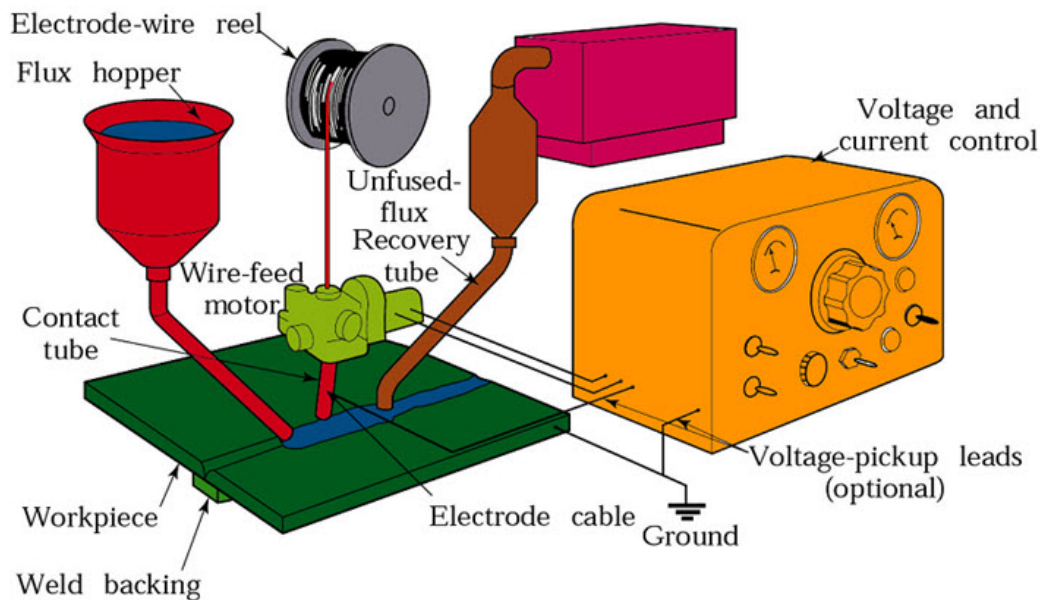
Schematic illustration of the submerged-arc welding process and equipment. The unfused flux is recovered and reused. (Source: American Welding Society).
